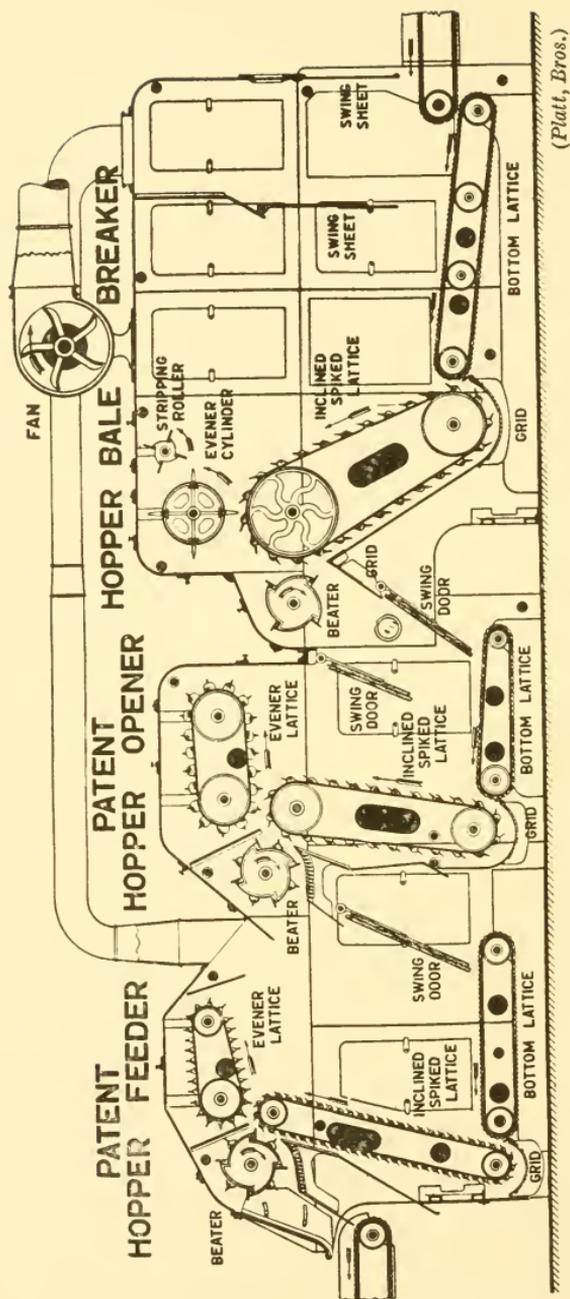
PLATT'S FEEDER, OPENER, AND BALE BREAKER
